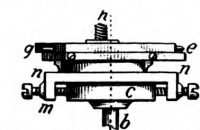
Concentric Ring. Fig. 14.—Side View of Elliptical Chuck.
